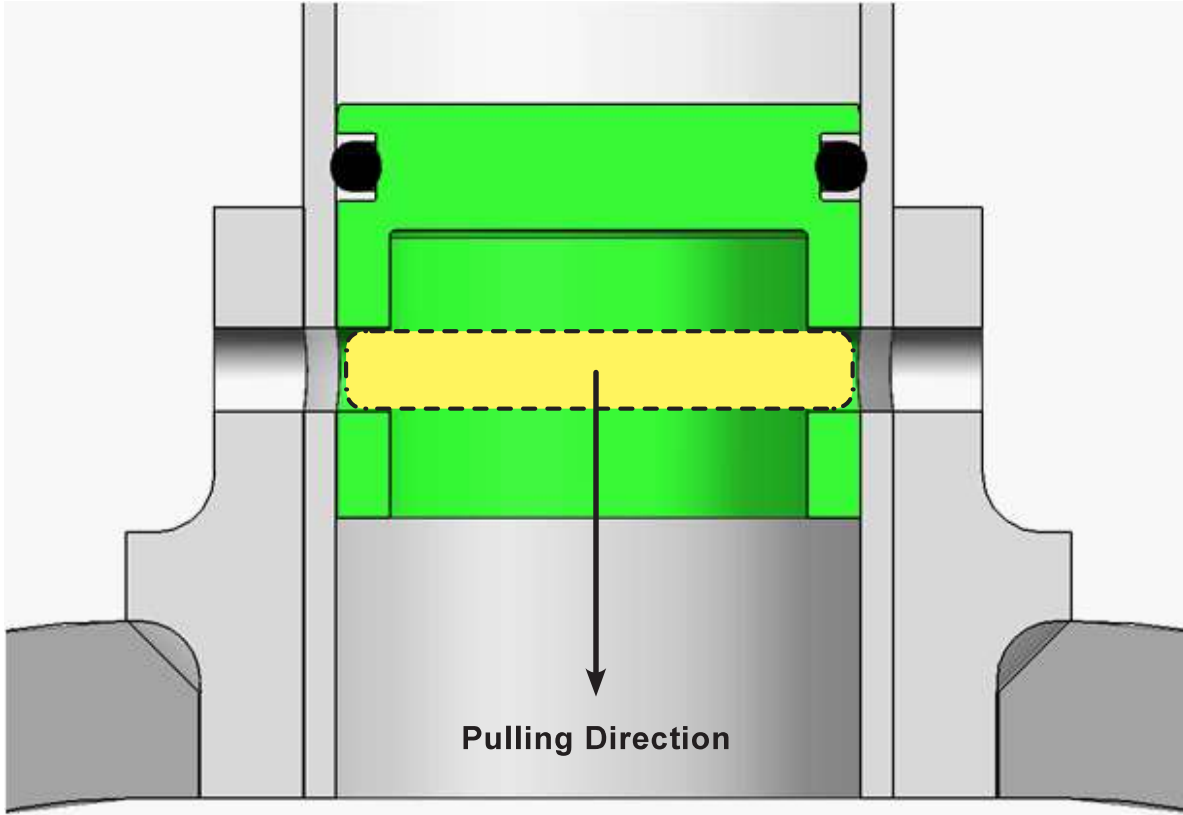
Cross Section View Showing Pulling Pin in Place
